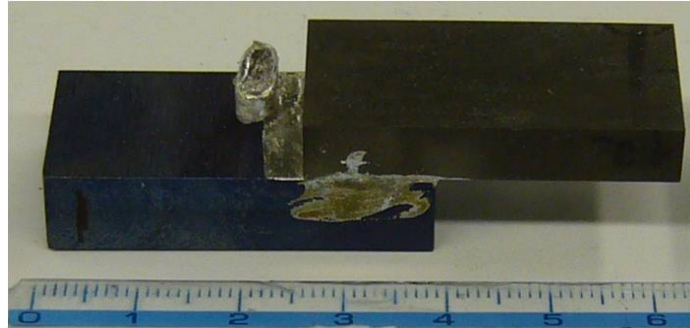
NiTi/O1 tool steel USS lap shear specimen.
